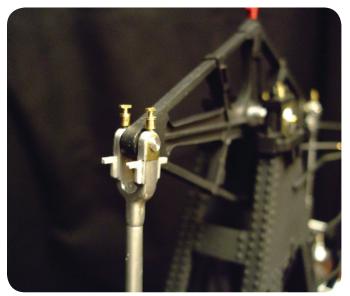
The final assembly of the top bearing including the two brass lubrication reservoirs.
